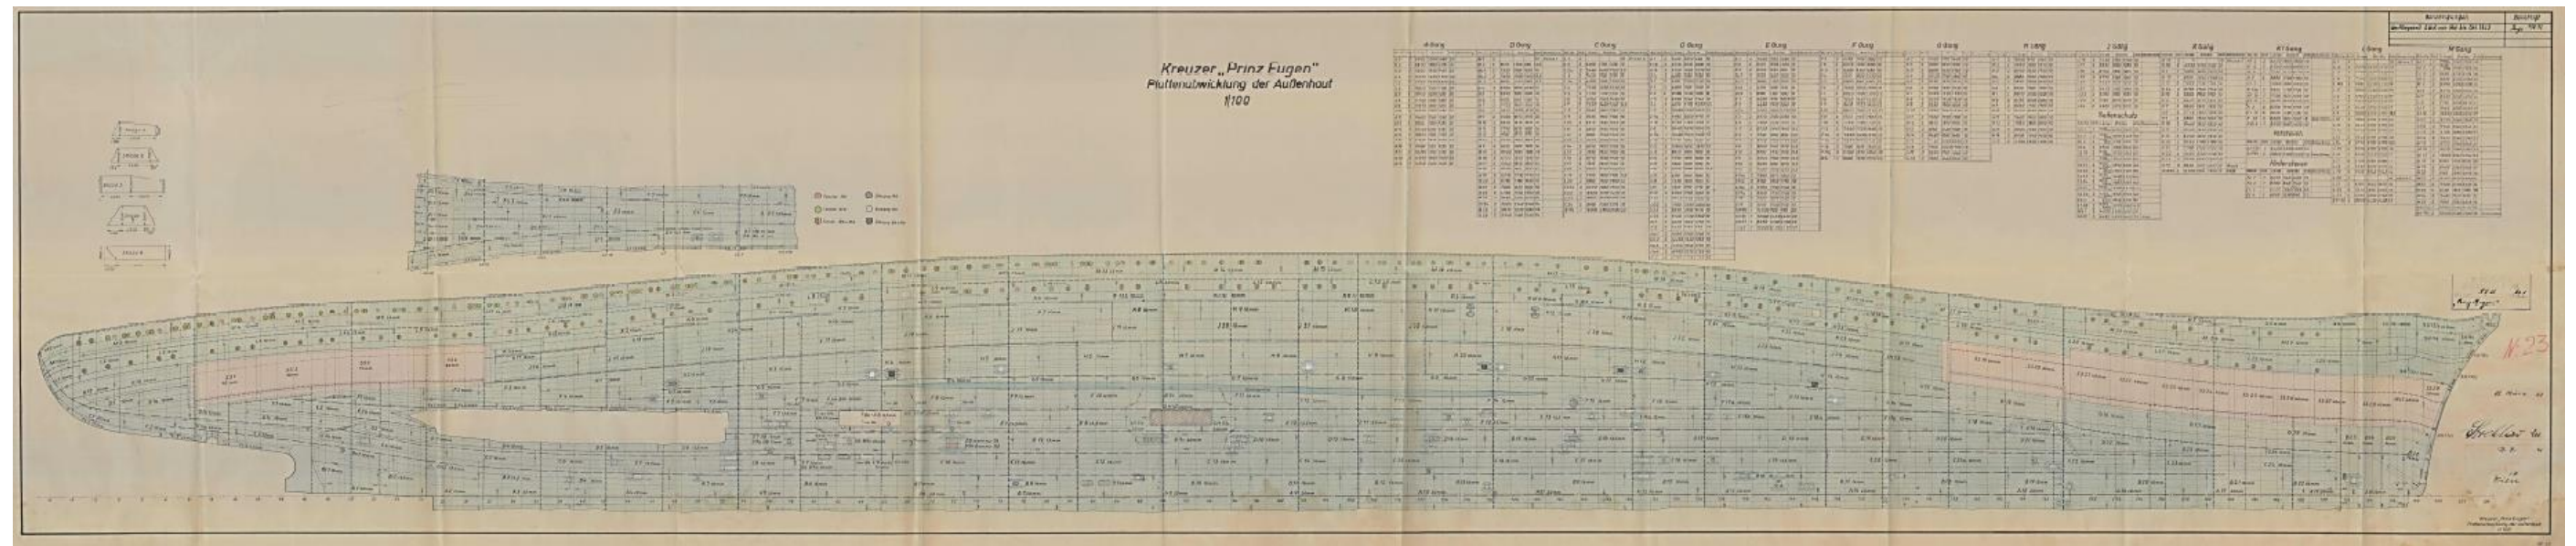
PRINZ EUGEN Shell Expansion Plan
